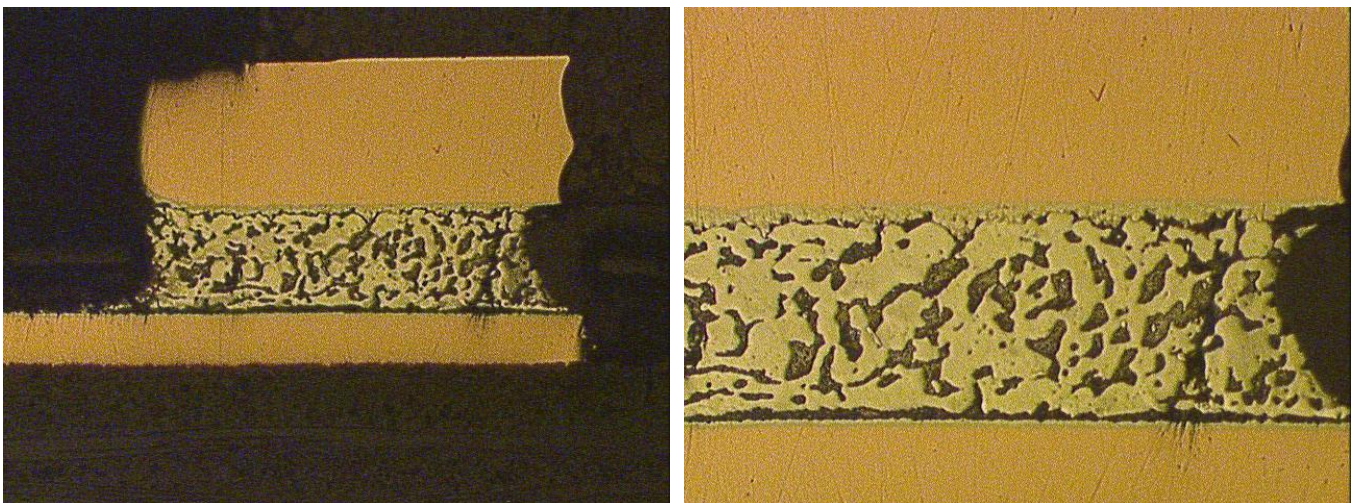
QFN-20 Solder Joints, Board 47, Component U15, SAC305/Sn, Reworked with Stencil Quik, 1 Rework, Failed @ 3660 Cycles
